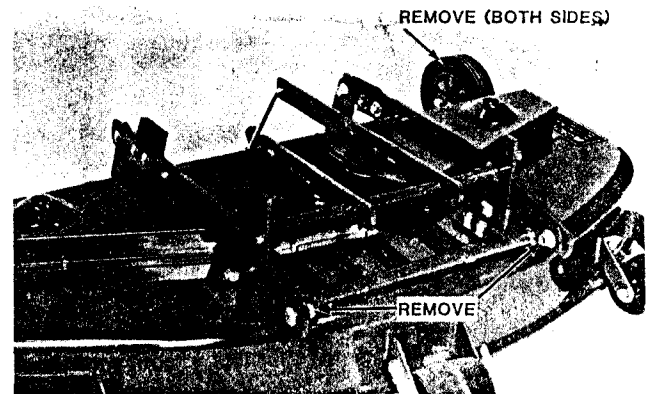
Remove Gage Wheels & Hitch Shaft (Either Mower)
